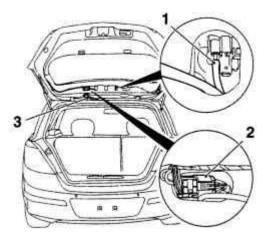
The supply line of the back of doors: 1 - hose washer rear window, 2 - electrical connector, 3 - rubber duster wiring
